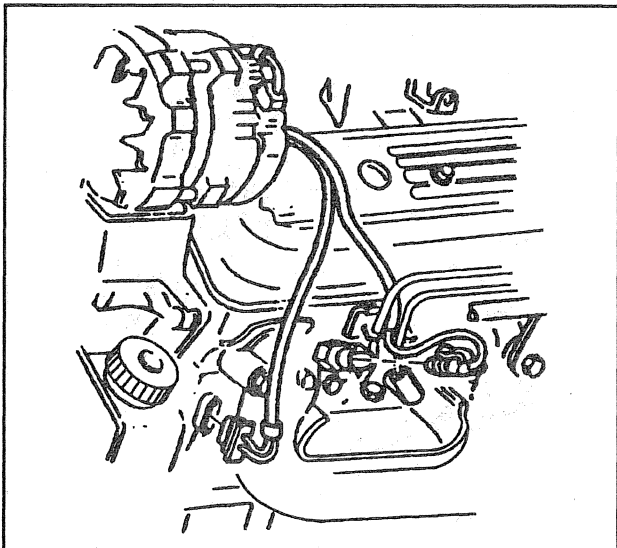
Engine Wiring Views - Left Side (5.0L - 5.7L)
